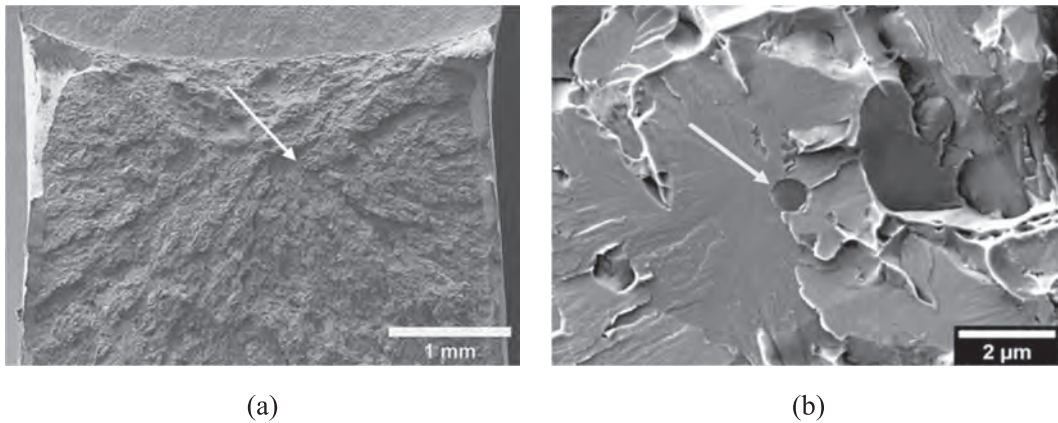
A) fracture surface and b) nucleating particle of the rpvh weld miniature c(t) specimen.
